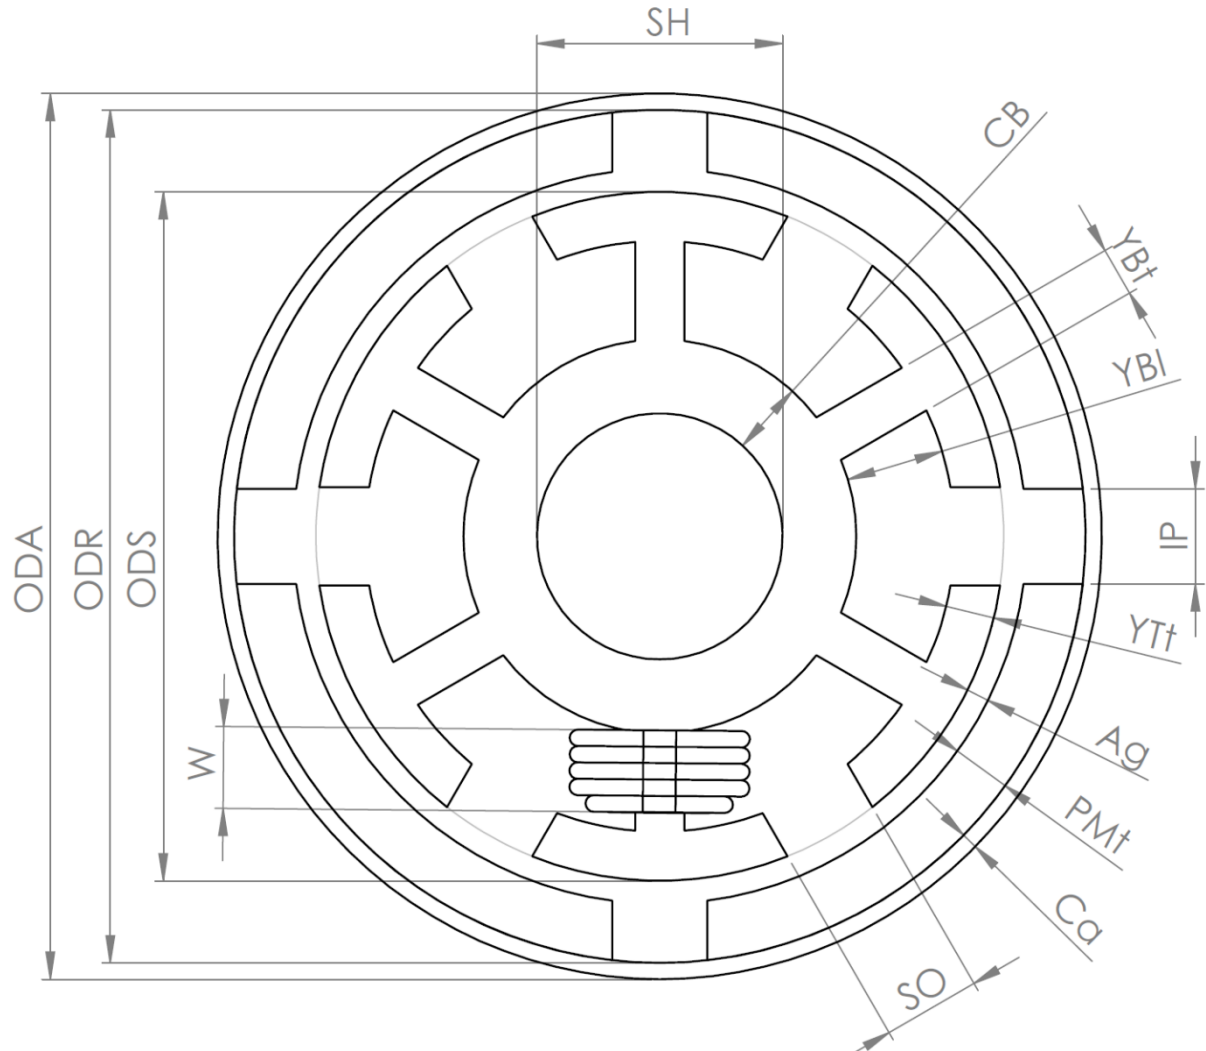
Dimensions of an outrunner BLDC motor. Ca, Case; CB, Core back length; IP, interpole length; ODA, outer diameter of the actuator; ODR, Outer diameter of the rotor; ODS, Outer diameter of the stator; PMt, Permanent magnet thickness; SH, Shaft hole diameter; SO, Slot opening; YBI, Yoke base length; YBt, Yoke base thickness; YTt, Yoke top thickness
